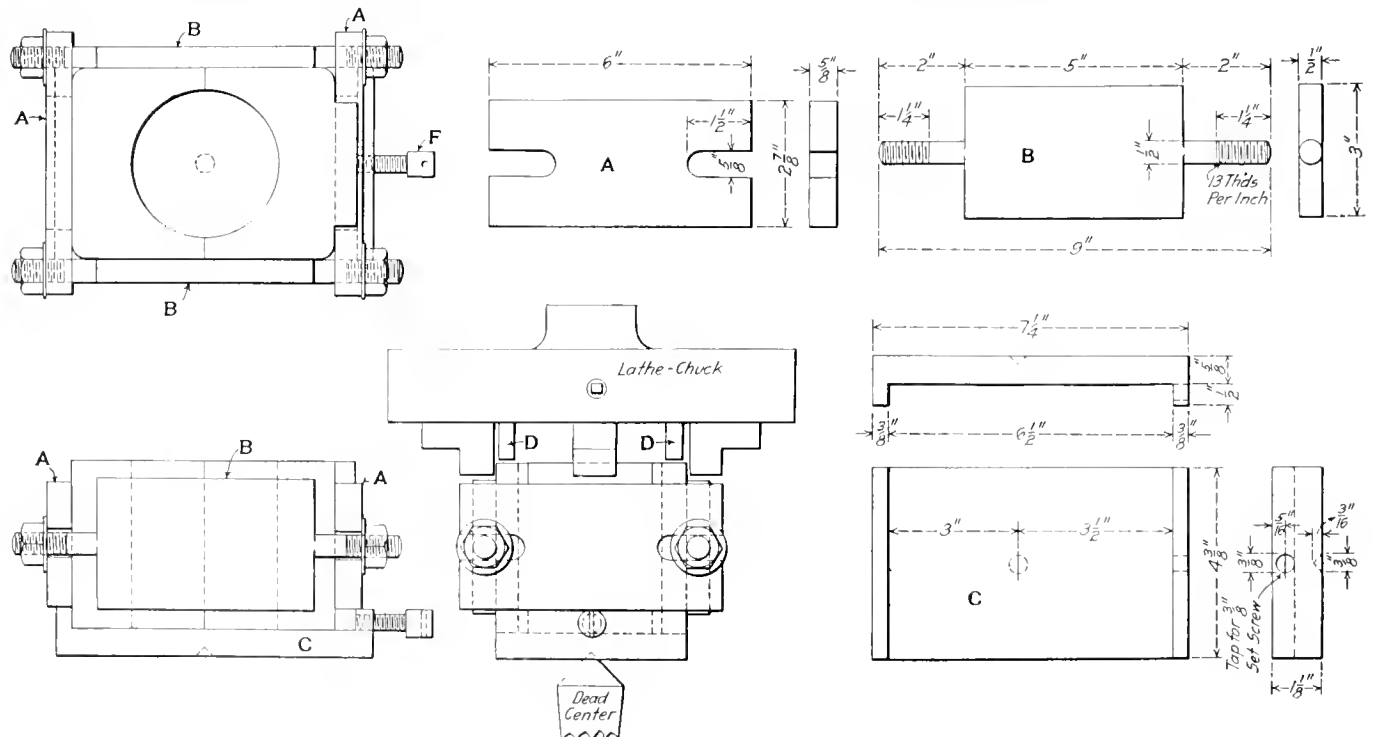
Handy Chuck for Boring Crosshead Pin Brasses.
